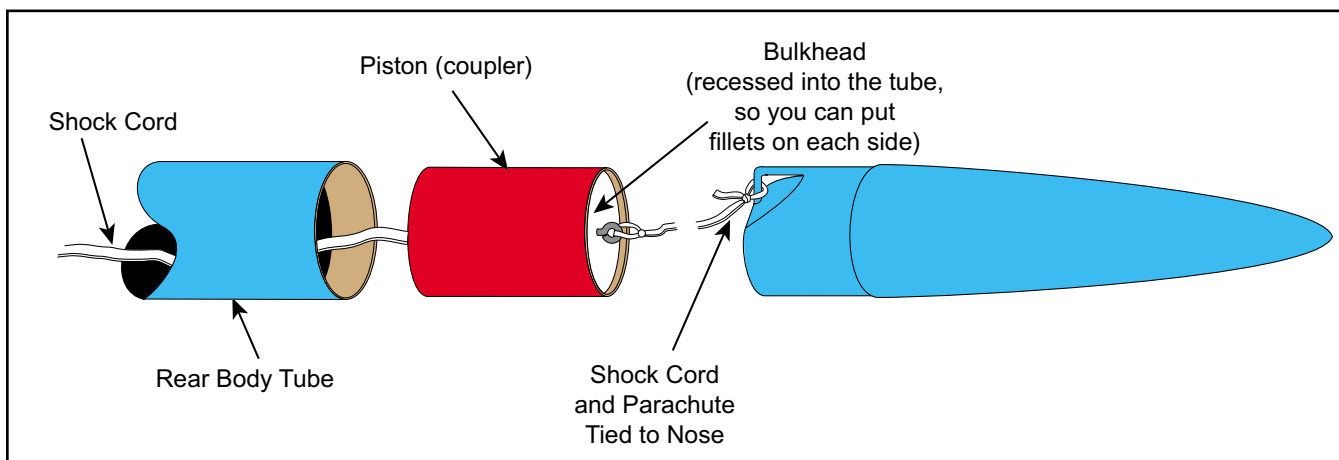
A piston pushes out the parachute. This is useful on larger diameter rockets.
